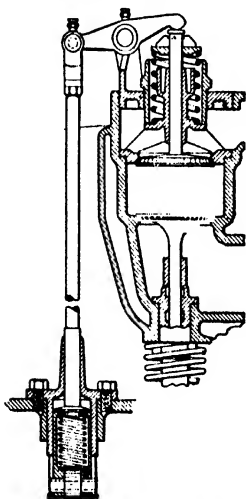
Section Through Valves, Overhead Valve Automobile Engine
